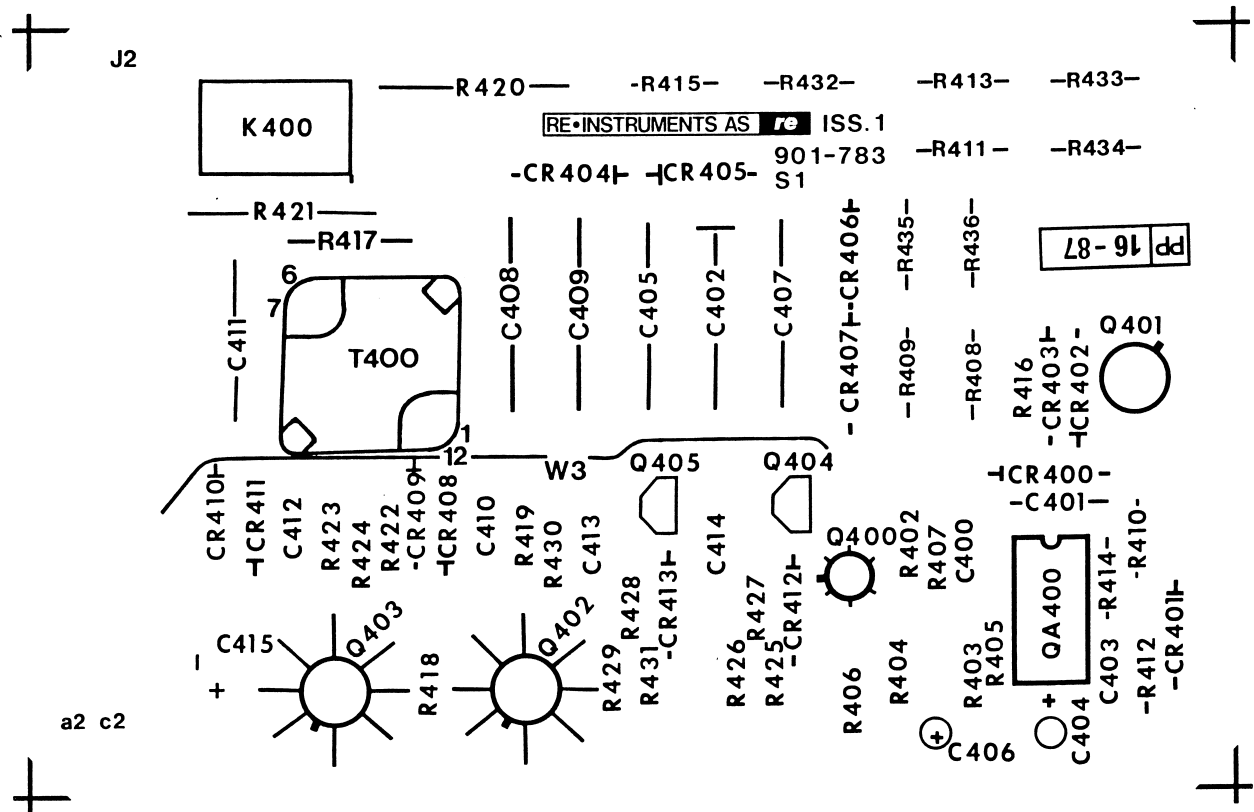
J2 Test Voltage Supply Printed-Circuit Board, Code 901-783
